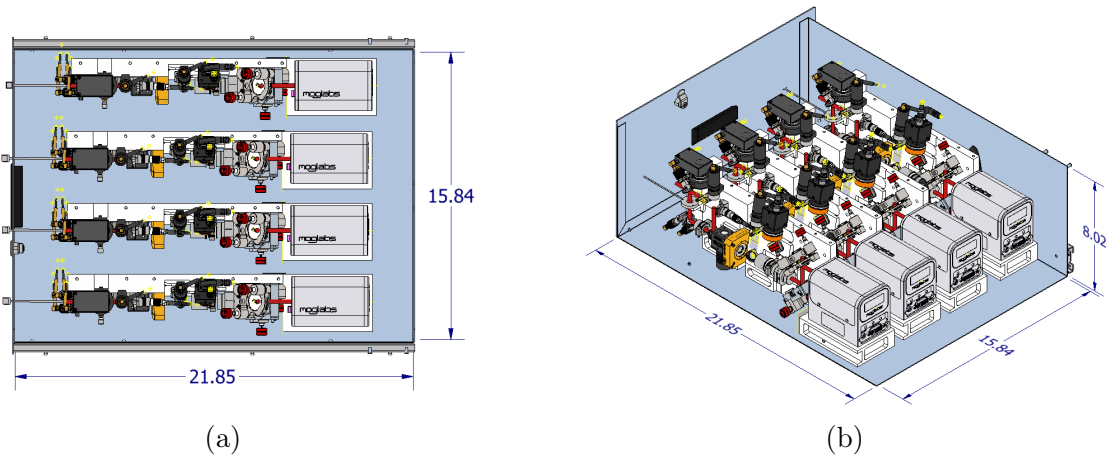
Top and quarter views of the optics rack drawer which will house 4 CW laser heads. This drawer will provide monitoring, coarse power control, and fibre couple all four laser heads.
